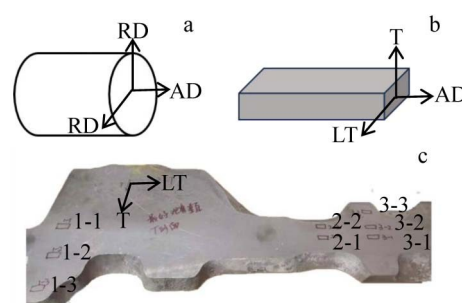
Schematics of Ti55511 bar after 10 passes of forging (a) and billet for die forging compressed from the Ti55511 bar (b); Ti55511 component after die forging (c) (T is compressing direction during die forging)
